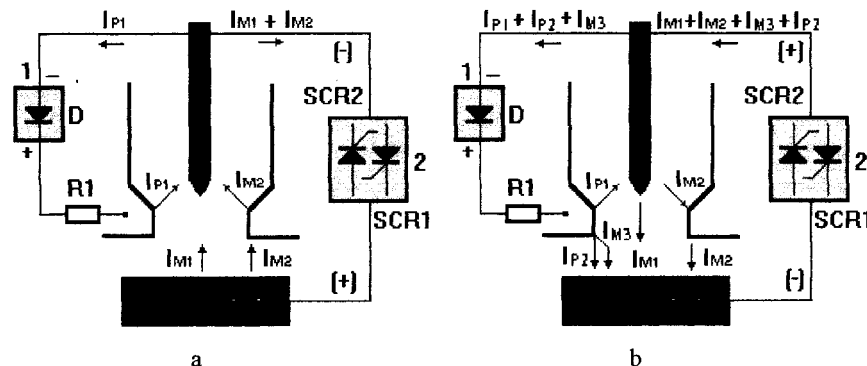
Direction of the welding current in a.c. PAW (a) in DCEN mode and (b) in DCEP mode
